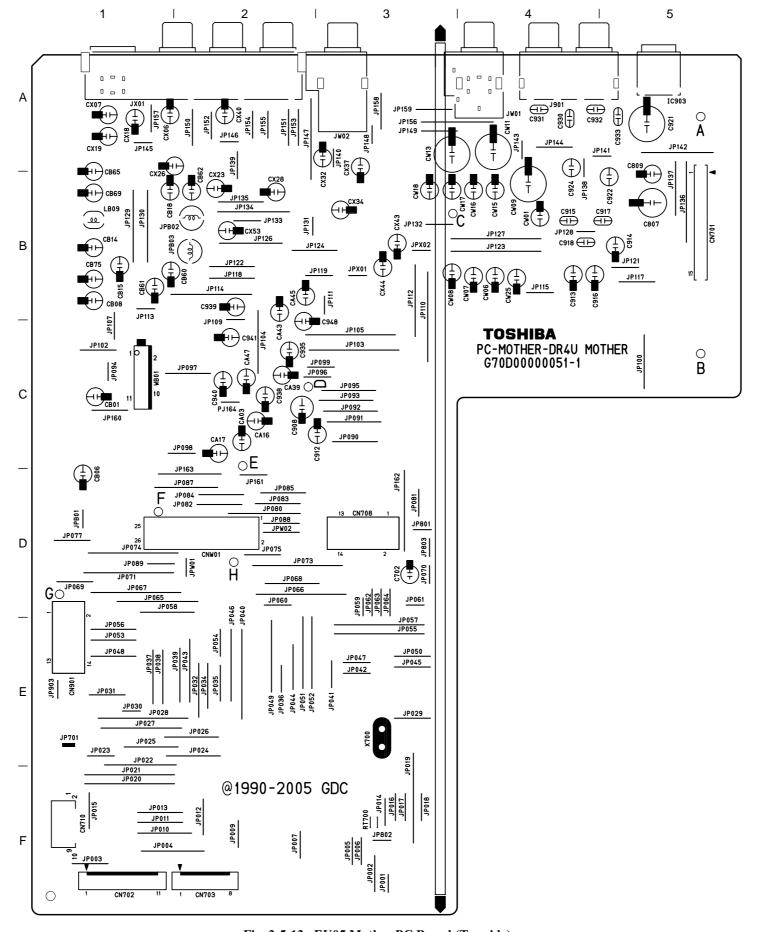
EU05 Mother PC Board (Top side)
